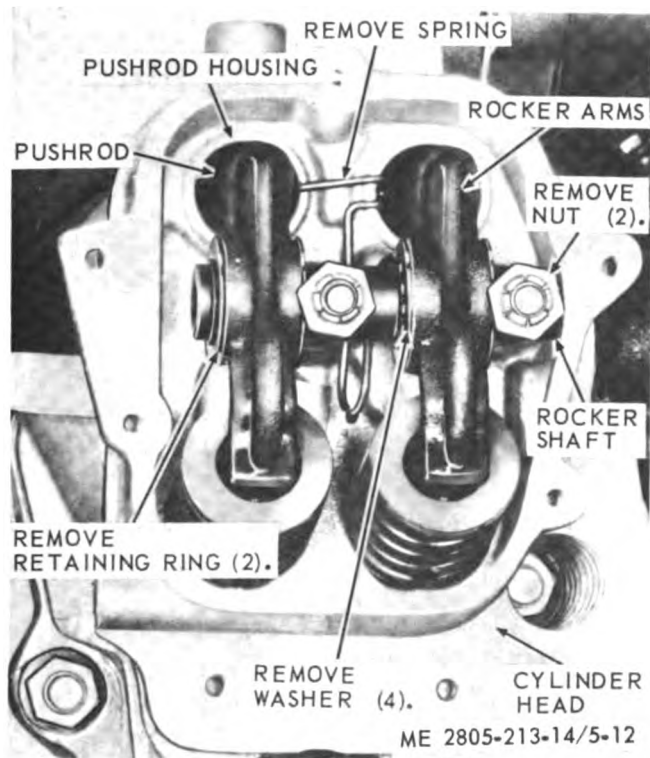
Rocker arms, pushrods, and pushrod housings, removal and installation (Model AO42-KM).
